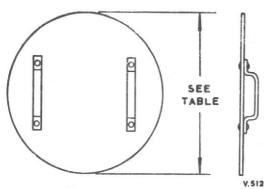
Disc gauge for venturi cuff and propelling nozzle
